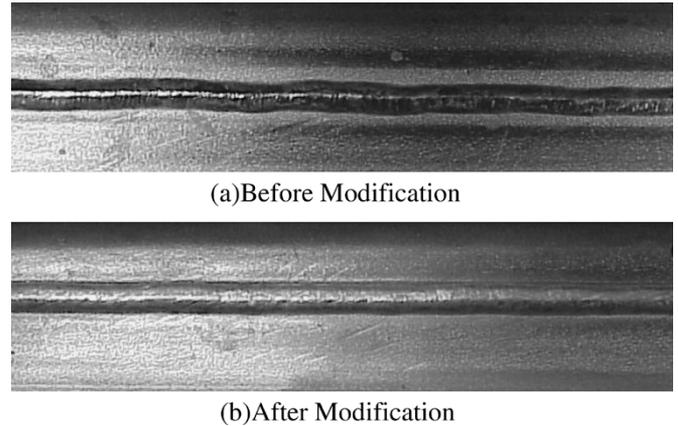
Welding back bead (a) before modification, (b) after modification.
